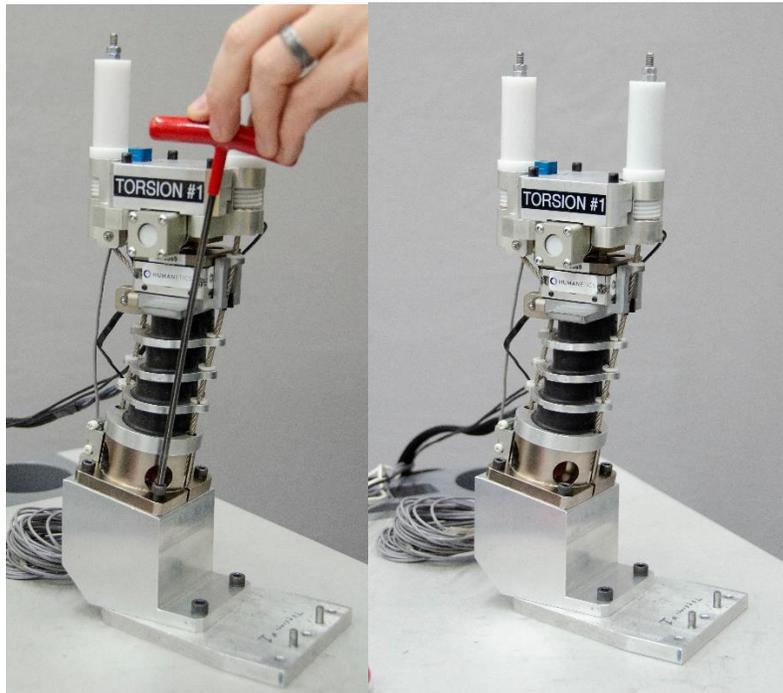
Neck with lower neck mounting adaptor (DL474-1350) and end plate assembly installed
